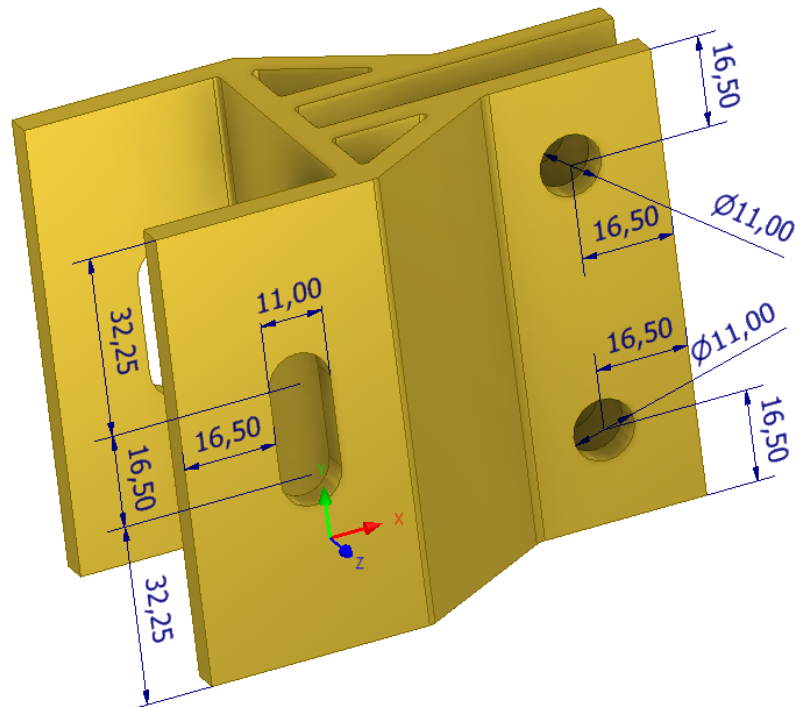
Bolt hole placement and extrusion length for small custom wind profile. All bolts size M10. Dimensions in mm.
